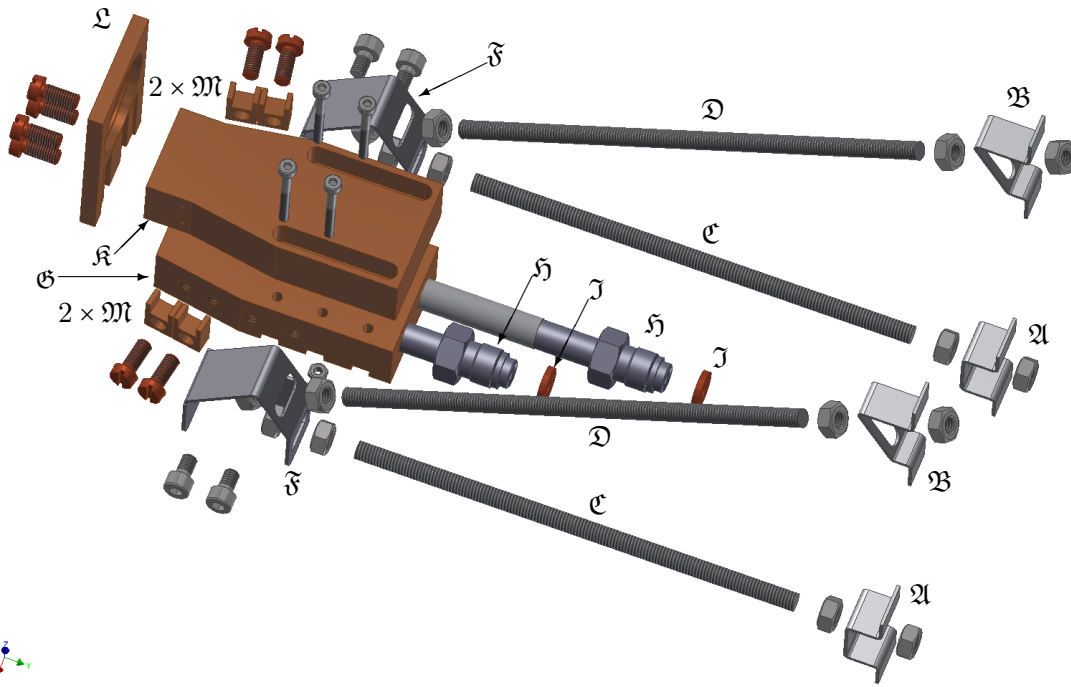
Assembly of the Thermal Reservoir — A custom made base flange (not shown, see Figure 2.4) with welded fixtures (A, B) holds the thermal reservoir (copper) with four threaded rods (C, D) on laterally adjustable shackles (F). The reservoir consists of a base part (G) equipped with VCR^{®a} connections (H) used with custom made copper gaskets (I) and an adjustable sled (K) carrying the moveable sample reception (L). The steady part also carries copper braids (M, only connector blocks shown) used to temperate the calorimeter head (not shown, see Figures 2.6 and 2.7). Joints with a desired high thermal conductivity are equipped with copper screws.
